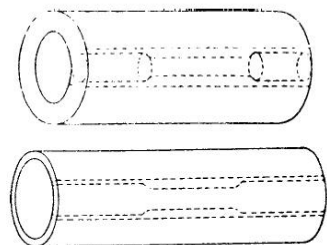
Squeezing Jig for Flattening Ends of Full-Size Tension Test Specimens
